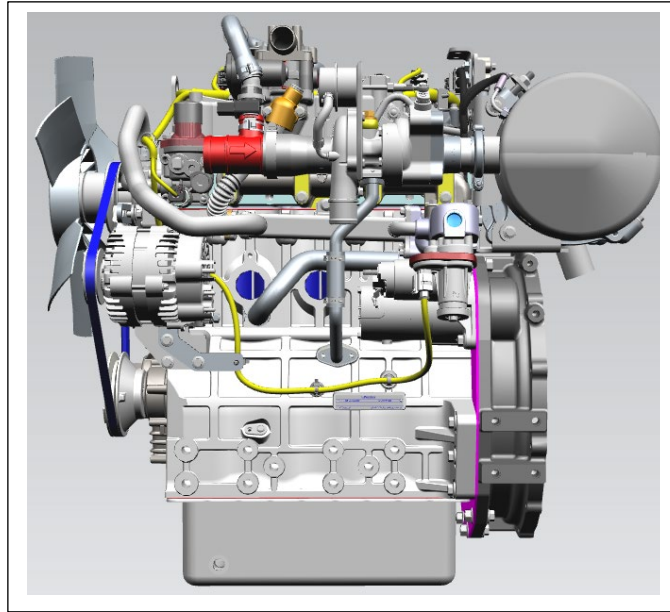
Engine Mounted aftertreatment (EMAT)
